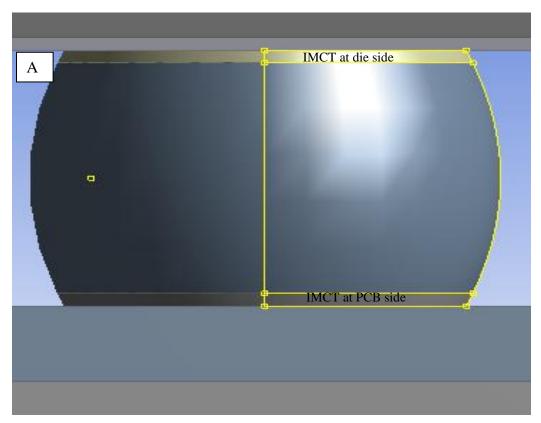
(a) Bump showing 6 µm thickness of IMC at both die and PCB sides of the FC assembly without mesh
